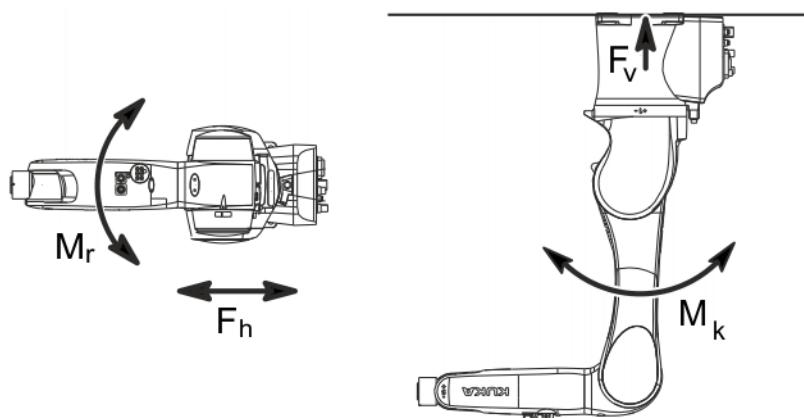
Loads acting on the foundation, ceiling mounting
